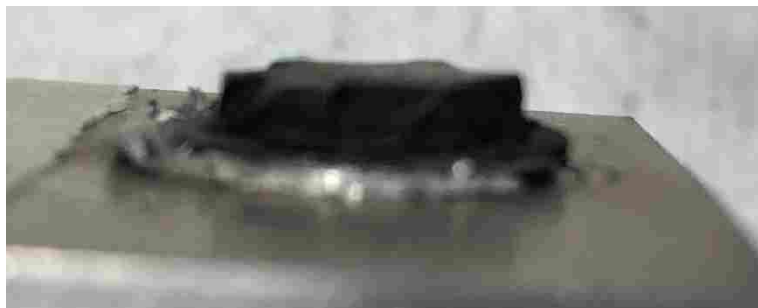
FBJ with Cap to Cover Aluminum Flash Instead of Removing It
